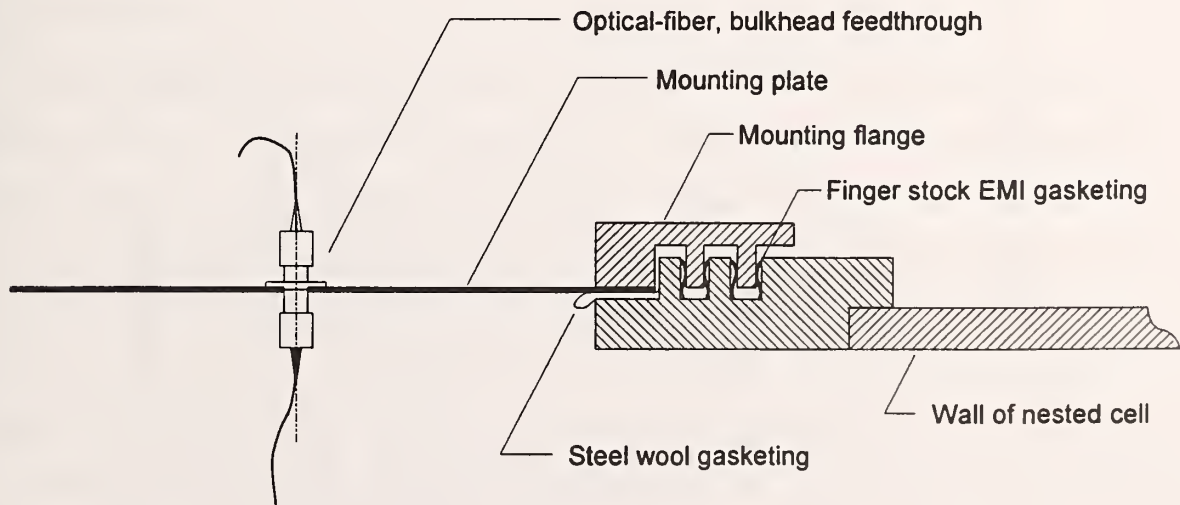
Detail of fixture for holding mounting plate in the nested cell.
